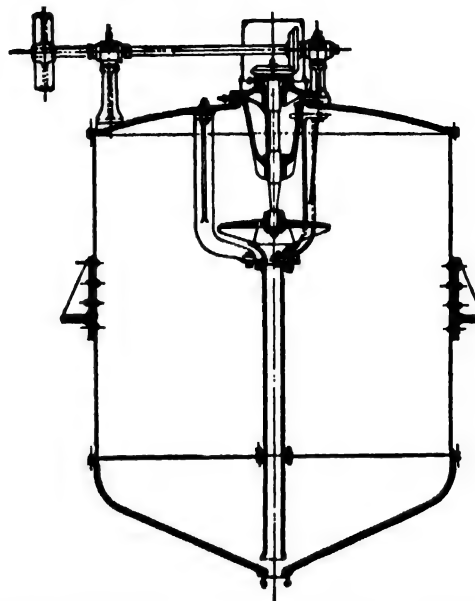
TURBINE IMPELLER AGITATOR AT TOP
